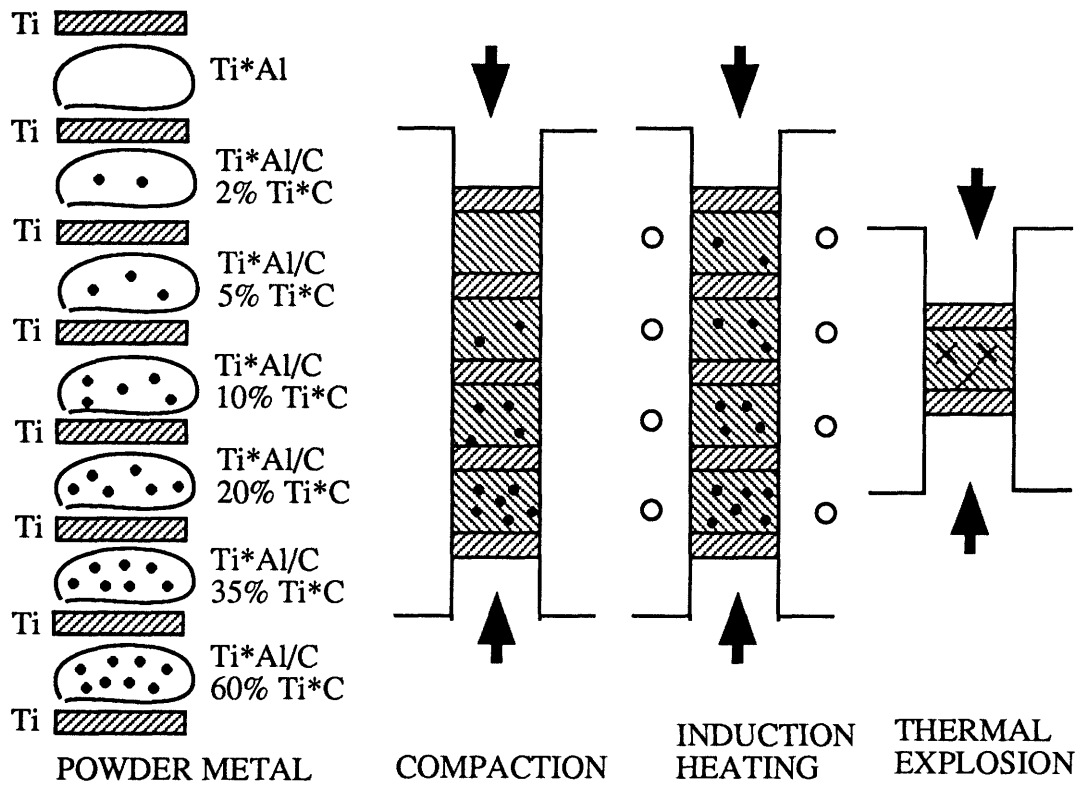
Schematic drawing of powder-sheet layered composites.
